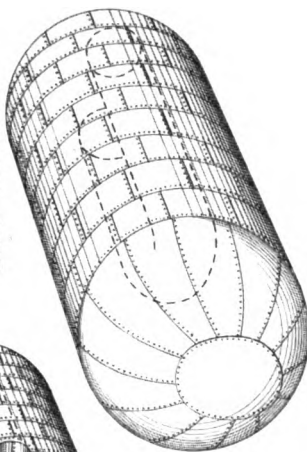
Breeches-Tube Boiler. Length 30'0" Diam. 8'0" Tubes 2'8" diam.
